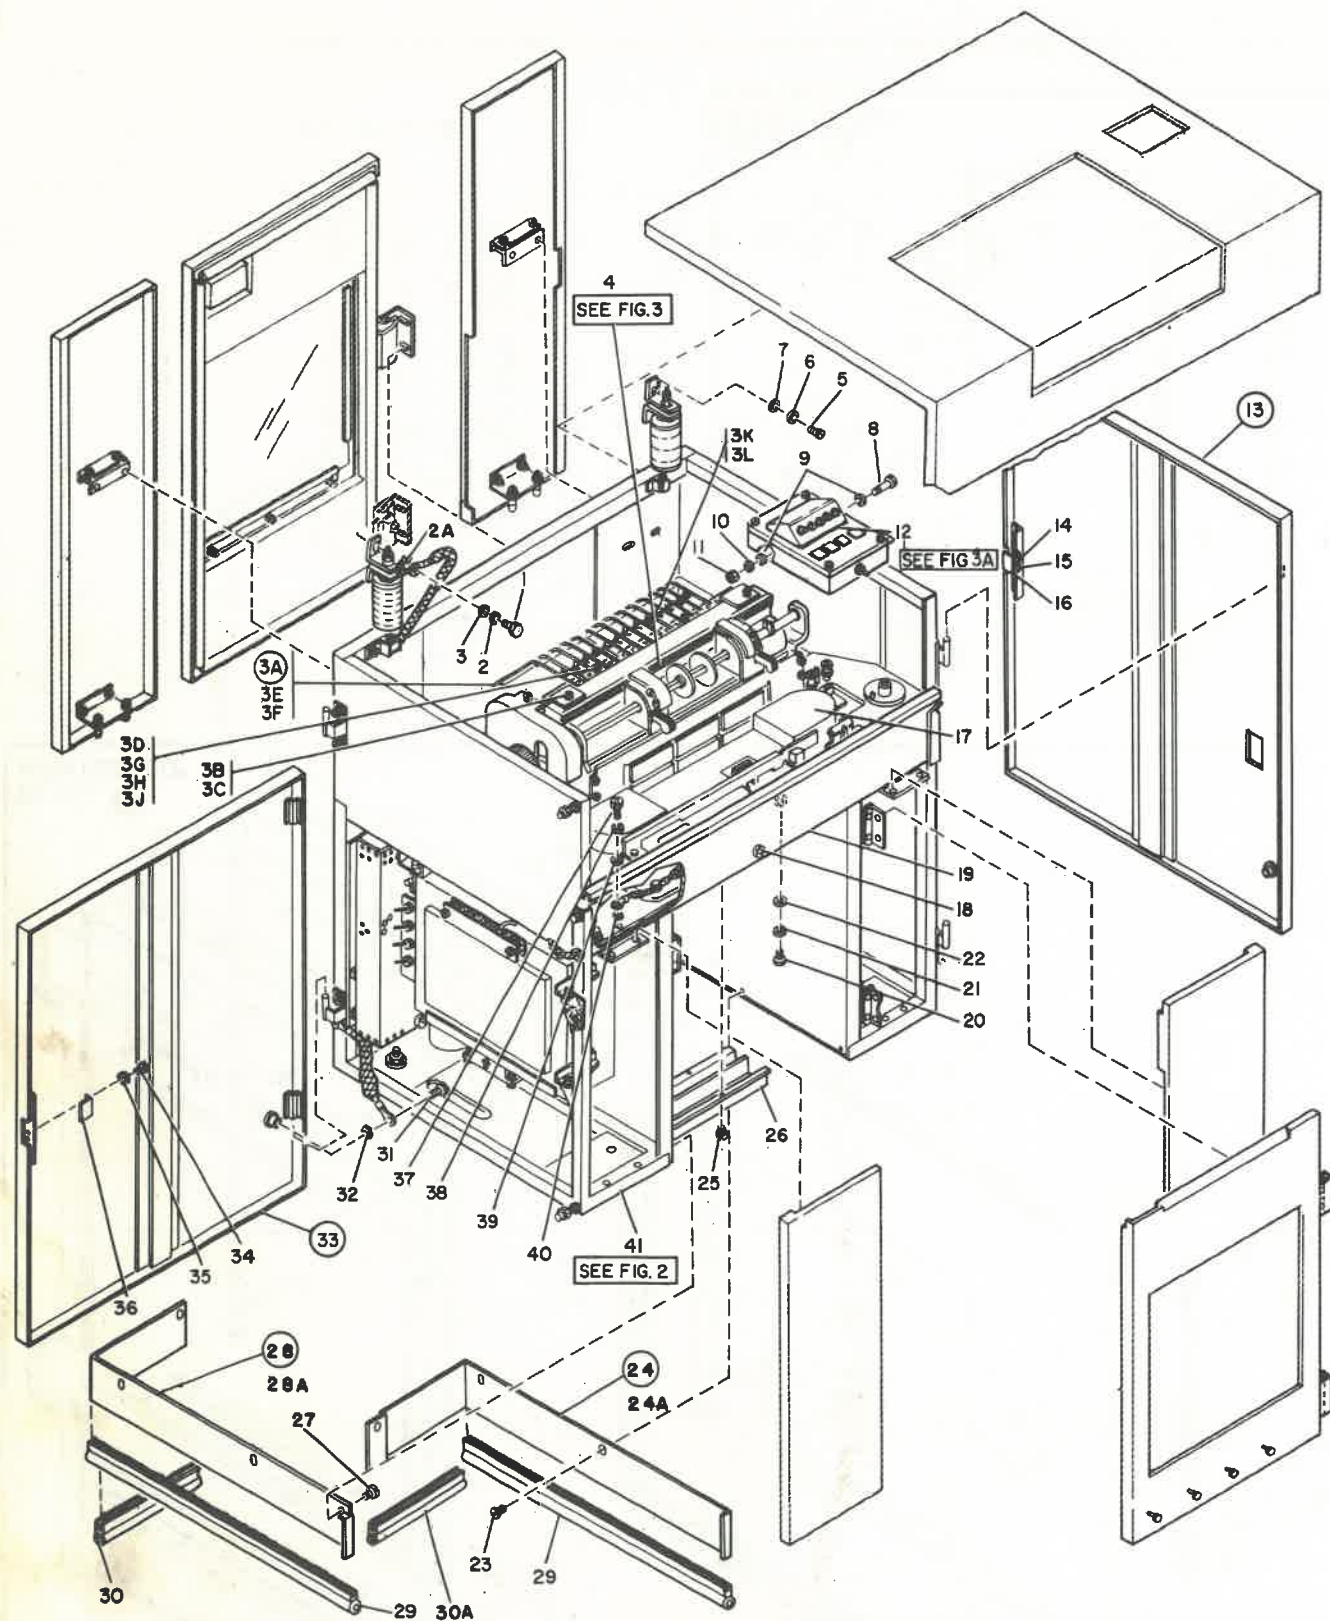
FINAL ASSEMBLY. SHEET 1 OF 5. INDEX NOS. 1-41 SEE LIST 1.
